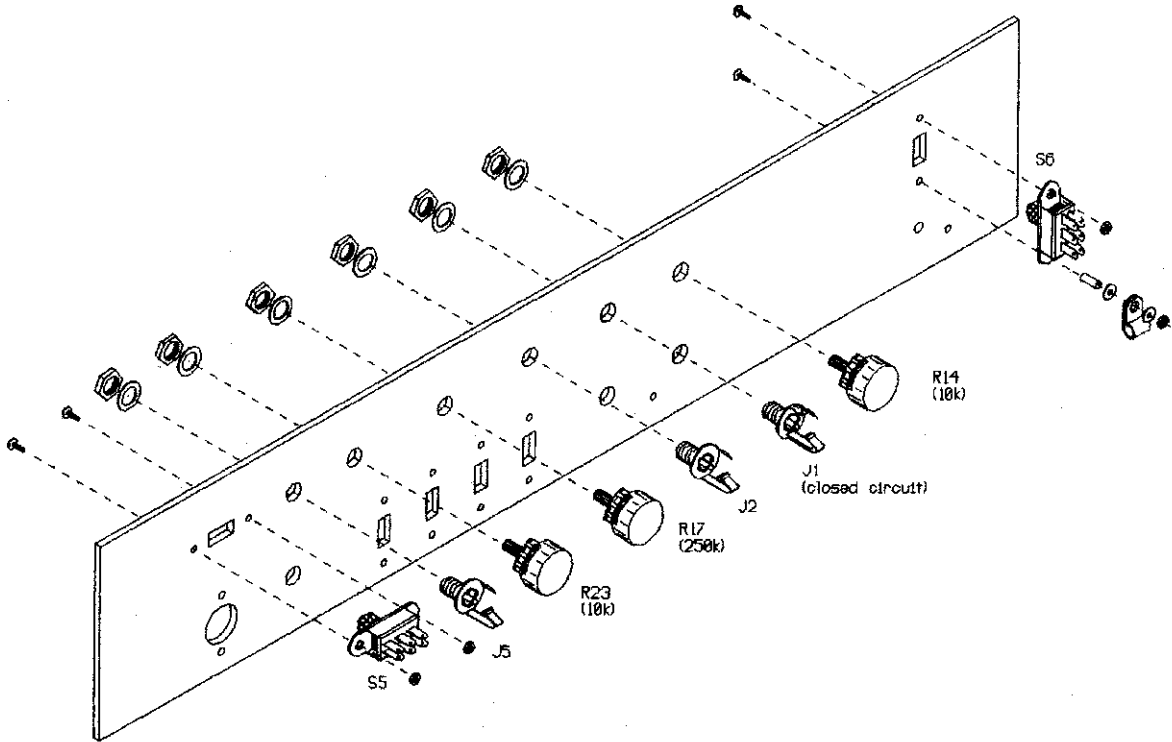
Potentiometers and Jacks mount to the panel using the 3/8" hardware supplied with them. Note the 1/2" machine screw that attaches the cable clamp to S6. J1 is a Closed Circuit Phone Jack.
